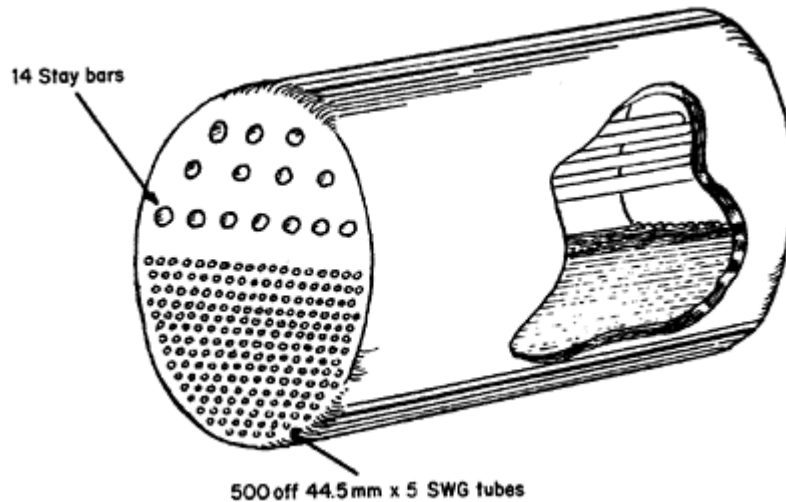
Cut-away view of a waste heat boiler showing tube bundle and stay bars.
